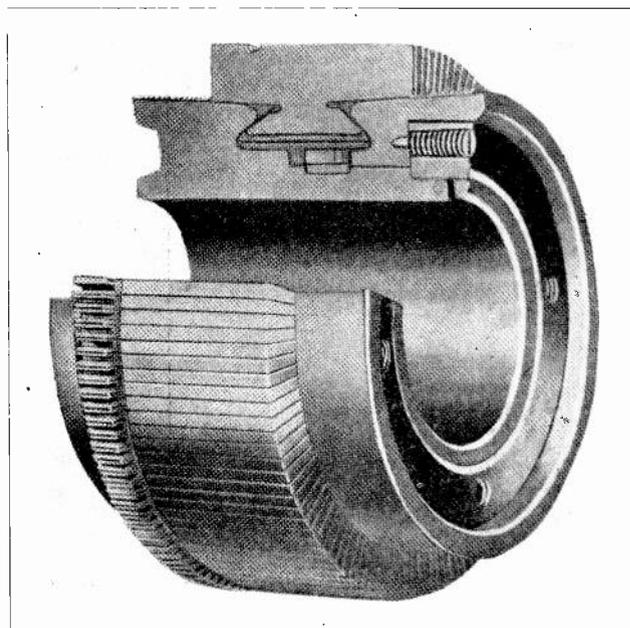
The above photo shows an excellent sectional view of a commutator for a D. C. machine.
